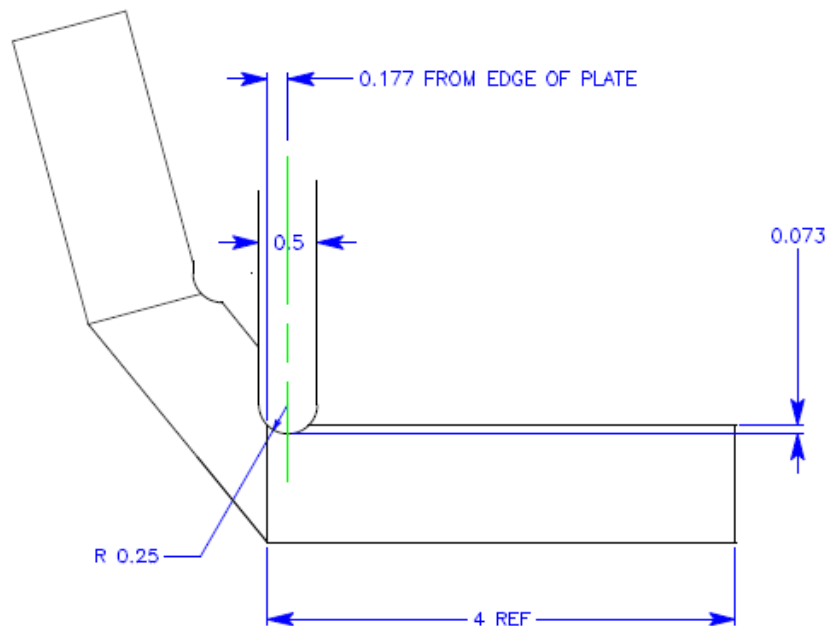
2 Weld Clean-Up for types "C", Ref [4]
